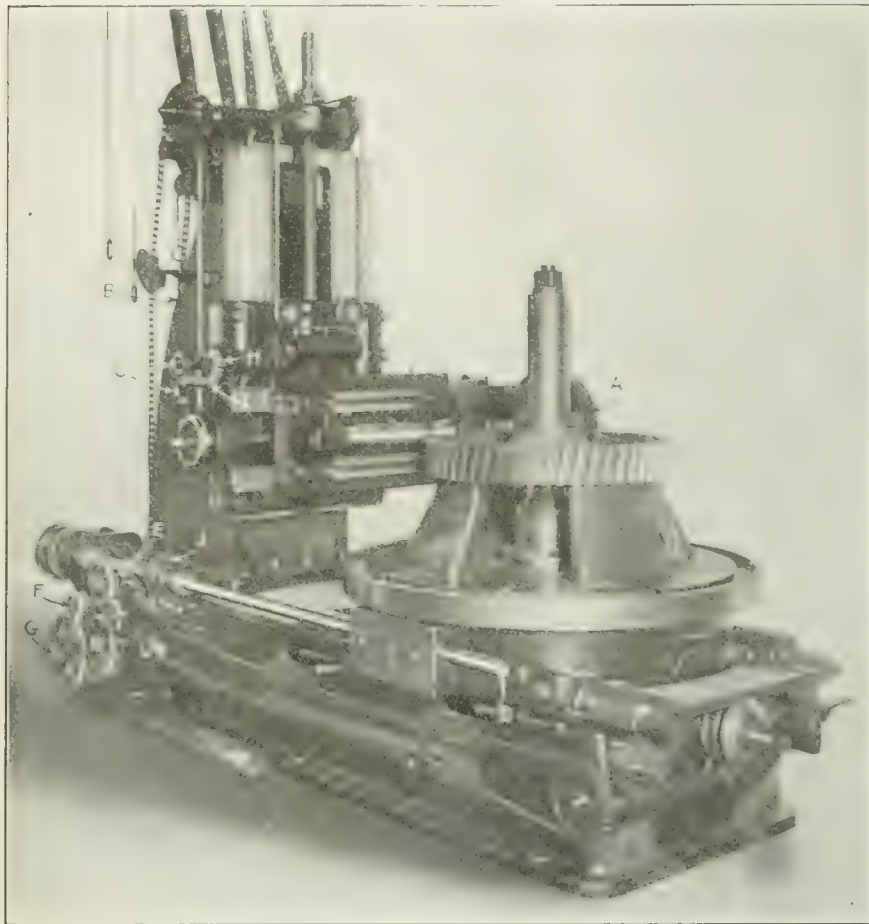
Cutting Worm Gears with a Fly Cutter on the No. 4 Standard Gear Hobber. Sold by Schuchardt & Schütte, New York City.
